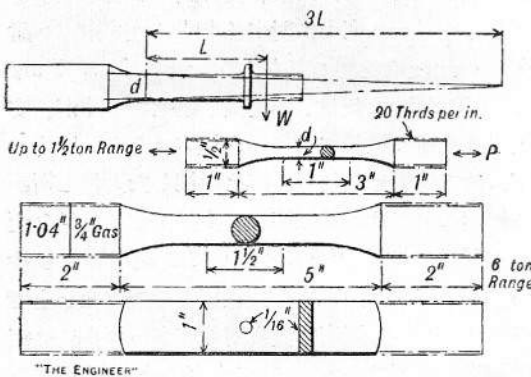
WOHLER AND HAIGH TEST-PIECES
